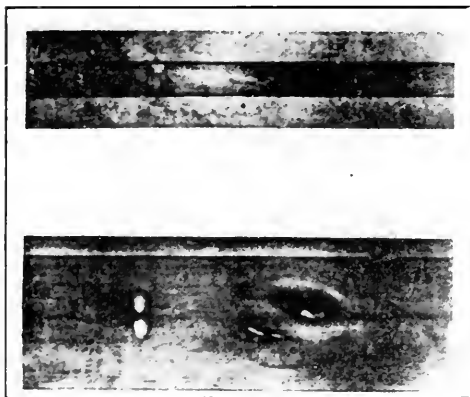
X-ray photograph showing front and side views of a laminated wooden spar of an acroplane. The spar is made up of three laminae glued together. The external appearance did not indicate that the middle layer contained two knots and a grub-hole and should not have been used.
